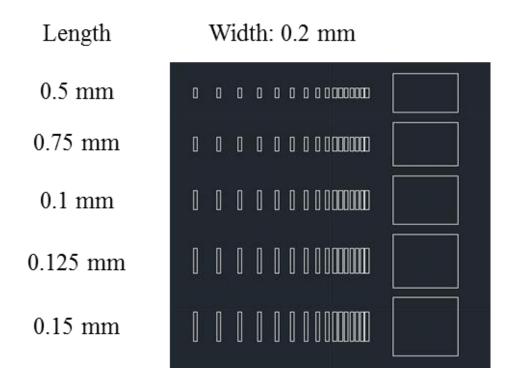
Schematic showing the design of the PCB pads for the solder bridging test.
